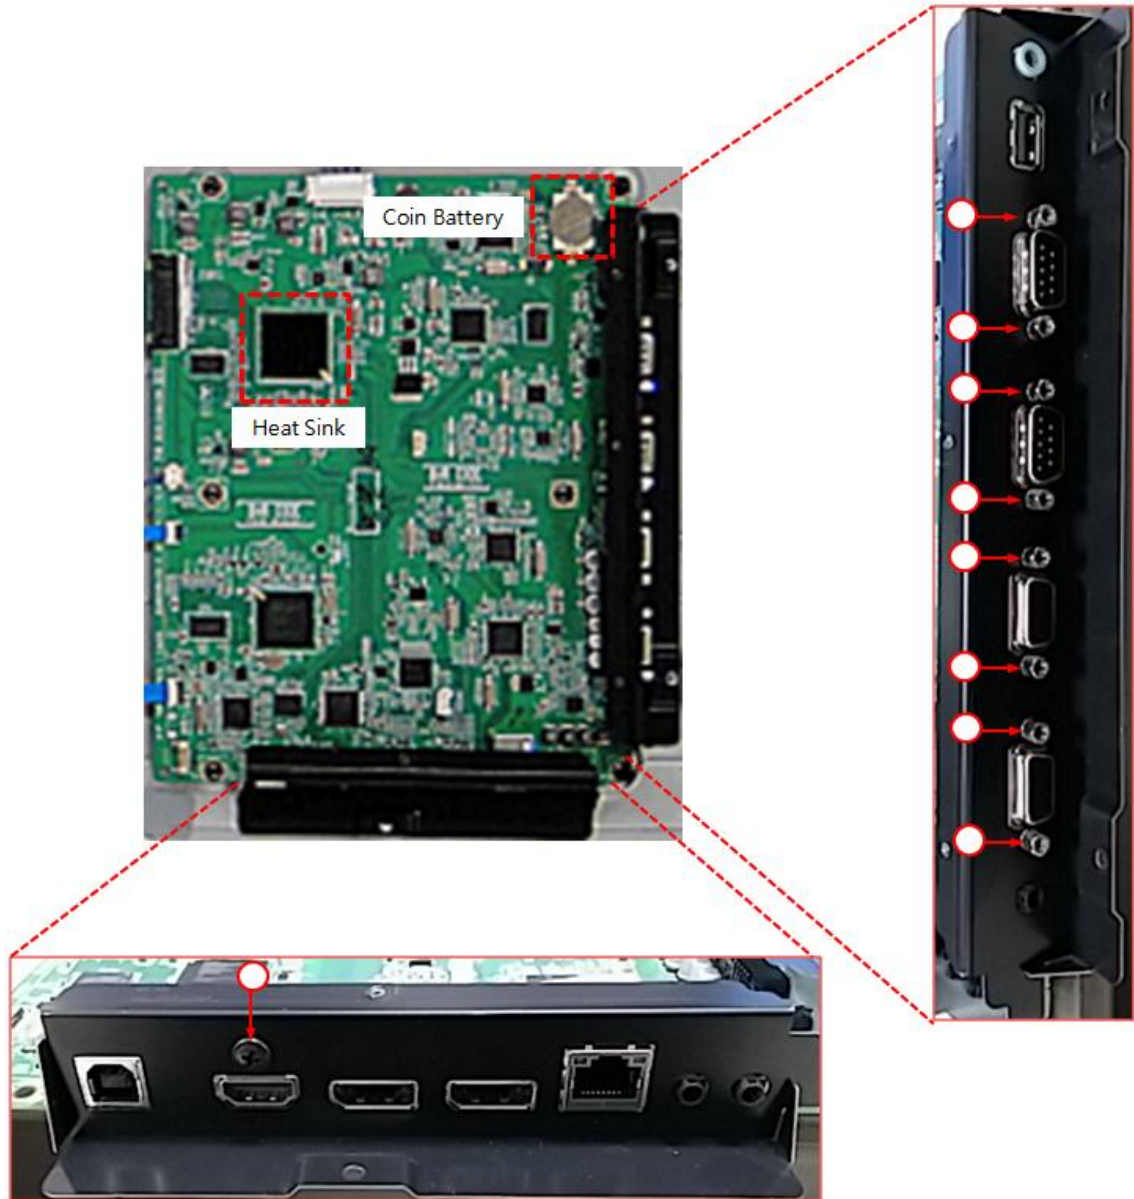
Remove screw 9EA, Disassemble AV Shield, Heat sink, Coin Battery
